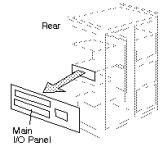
Rackmount Chassis Component - Main I/O Panel (Fixed I/O)
